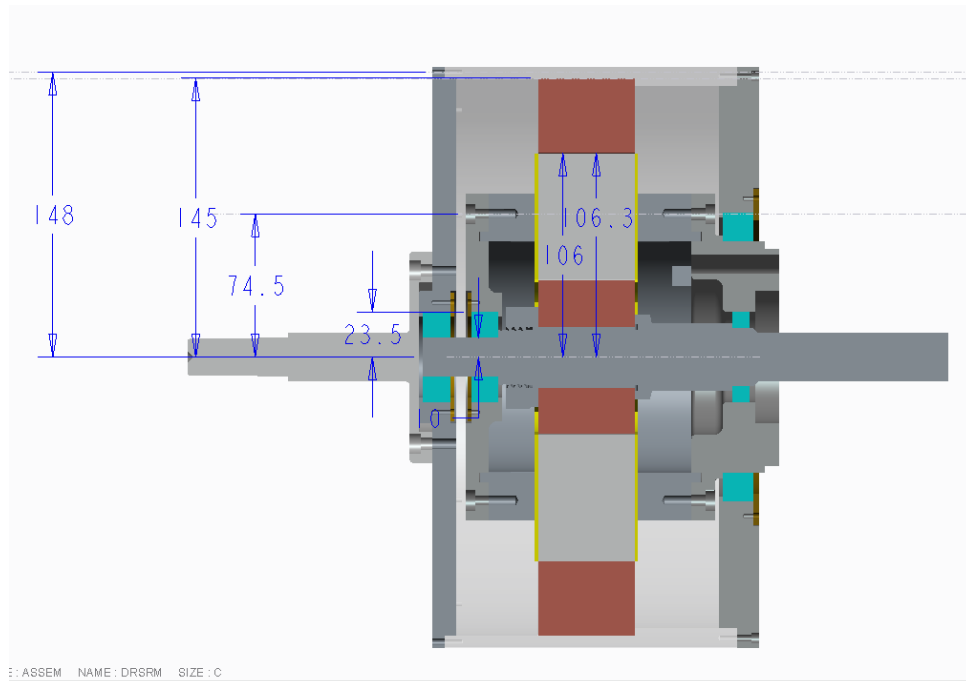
Exterior SRM assembly stacking chain (dimensions in mm)
